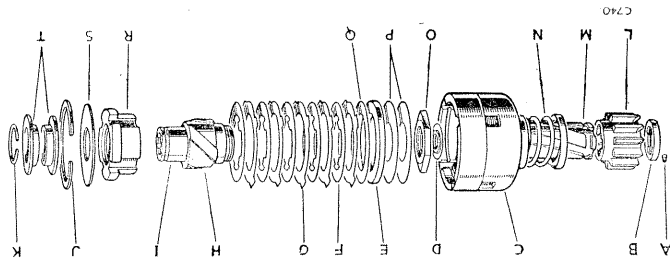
Exploded view of starter drive assembly, Diesel models
